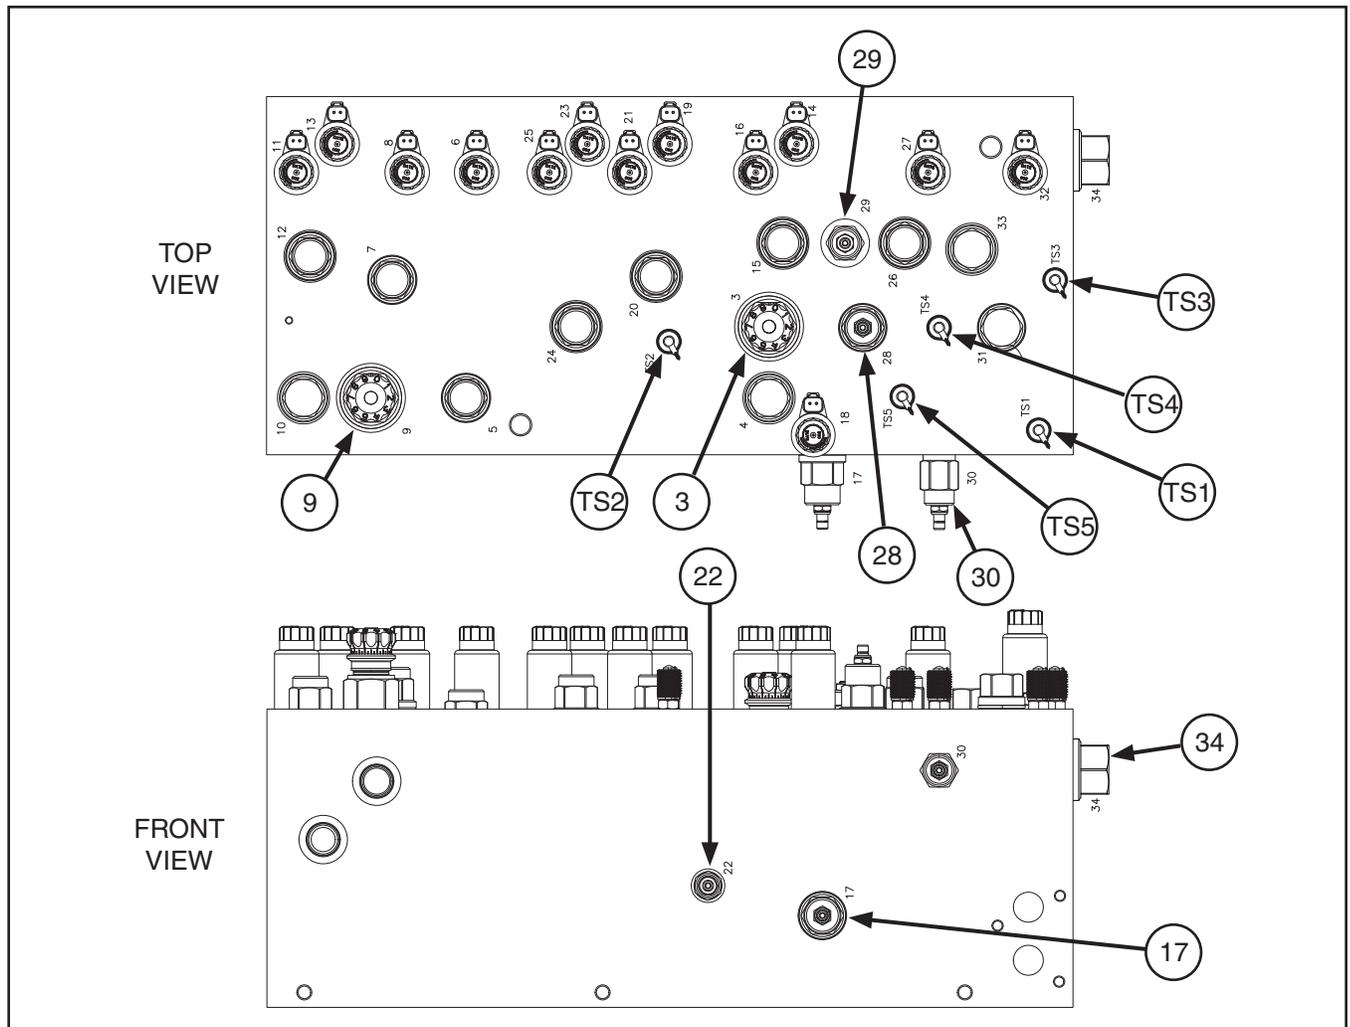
Hydraulic Manifold Valve & Test Port Locations
